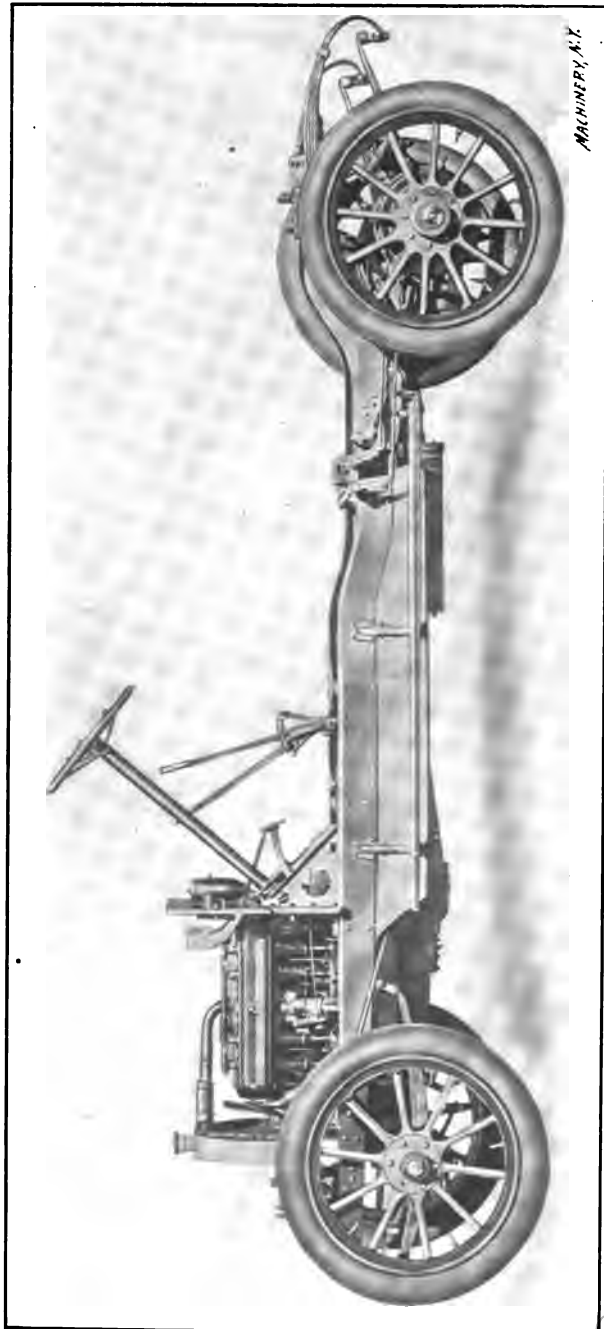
Chassis of an F. B. Stearns Motor Car, showing Three-quarter Elliptic Spring Suspension in Rear and Semi-elliptic Springs in Front
